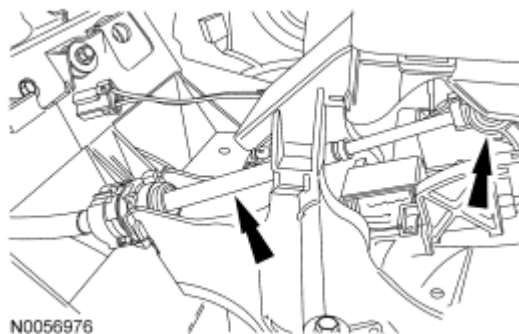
Locating Shift Cable From Ball Stud On Shifter
